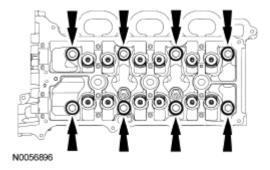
Locating Cylinder Head Bolts Courtesy of FORD MOTOR CO.
